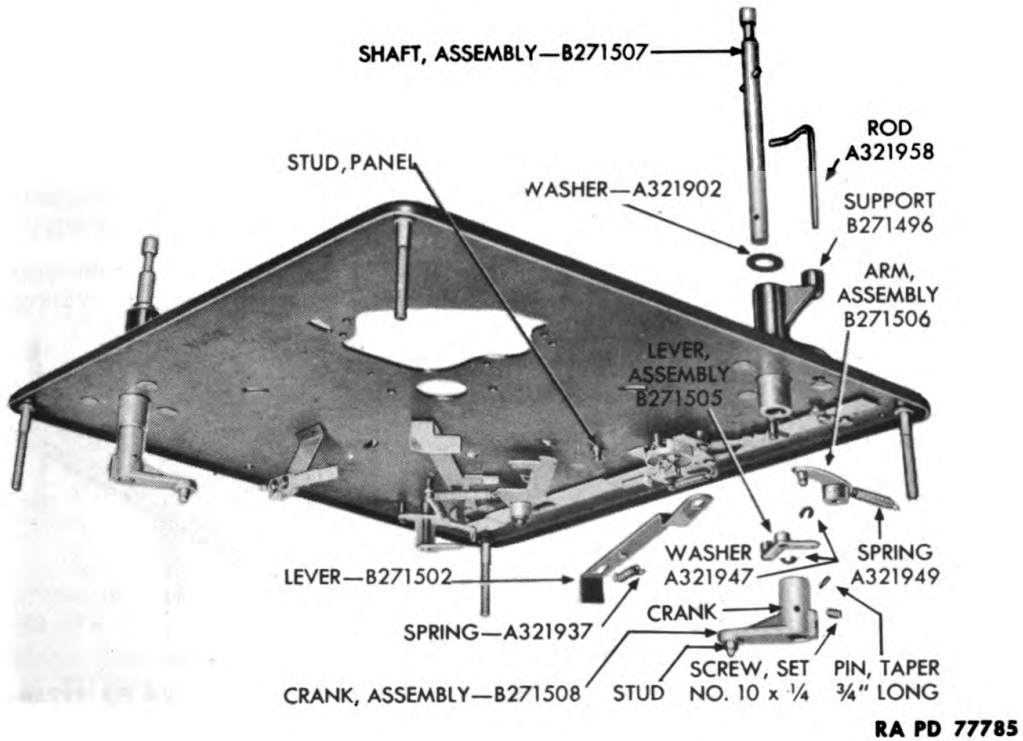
Removal of Selector Shaft and Related Parts From Record Changer
